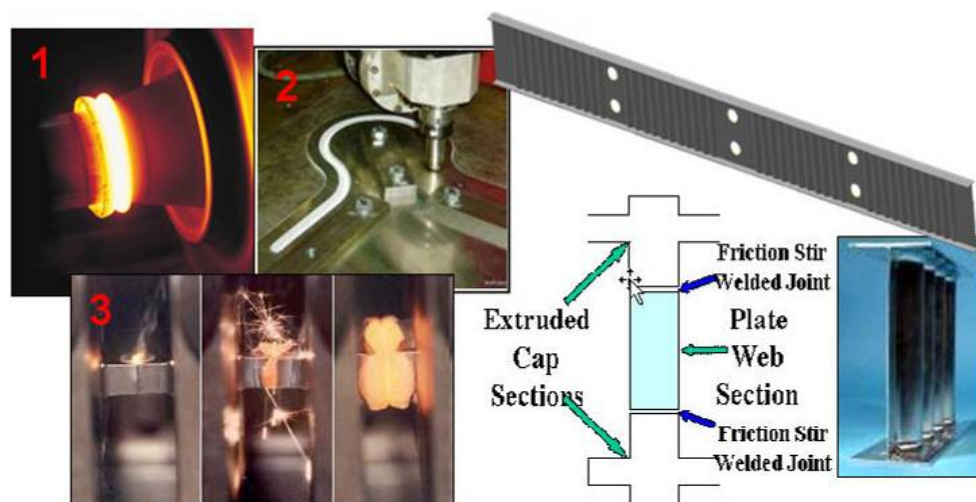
Emerging aluminum fabrication technologies for low buy-to-fly stock: 1) Rotary Friction Welding, 2) Friction Stir Welding, and 3) Linear Friction Welding.
